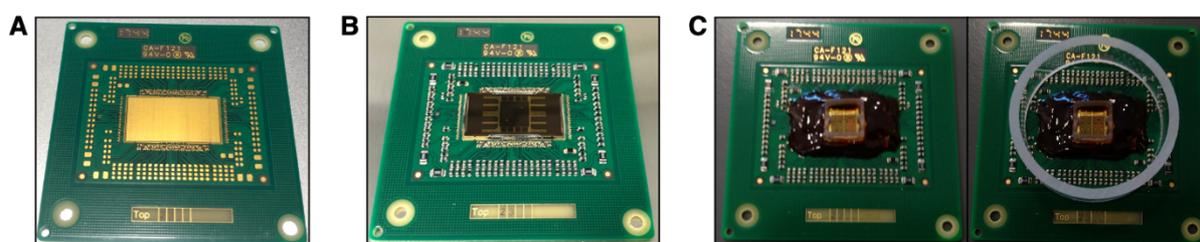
Photographs of [A] printed circuit board (PCB) used for chip packaging, [B] 'no epoxy' Taipro chip and [C] manually encapsulated chip with insert plus glass ring used in 'external epoxy full' Taipro chips for comparison.
